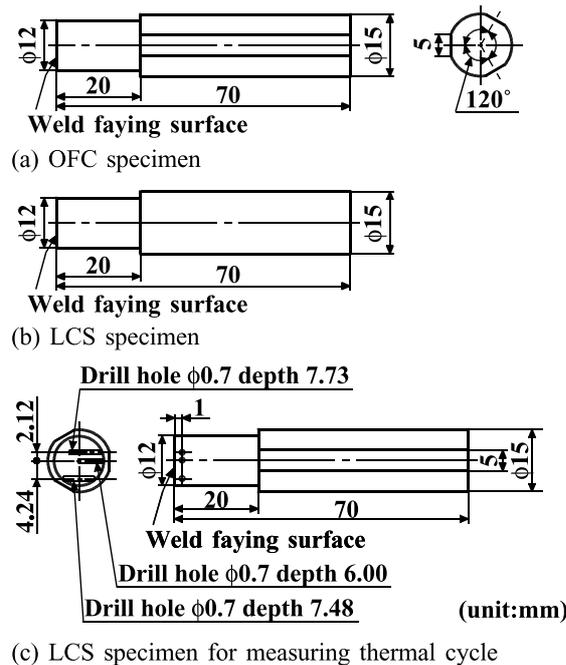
Shapes and dimensions of friction welding specimens.
